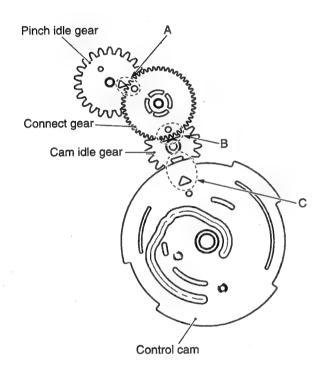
Gear Positioning 1 (Bottom Panel Side)
